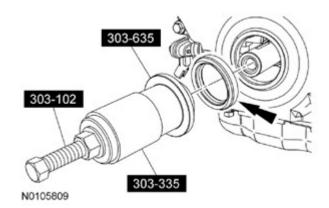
Installing Crankshaft Front Seal Using Crankshaft Front Oil Seal Installer Courtesy of FORD MOTOR CO.
